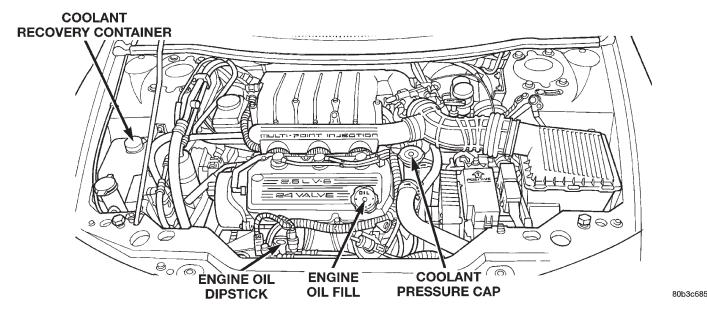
Coolant Recovery Container and Pressure Cap Locations—2.5L Engine
